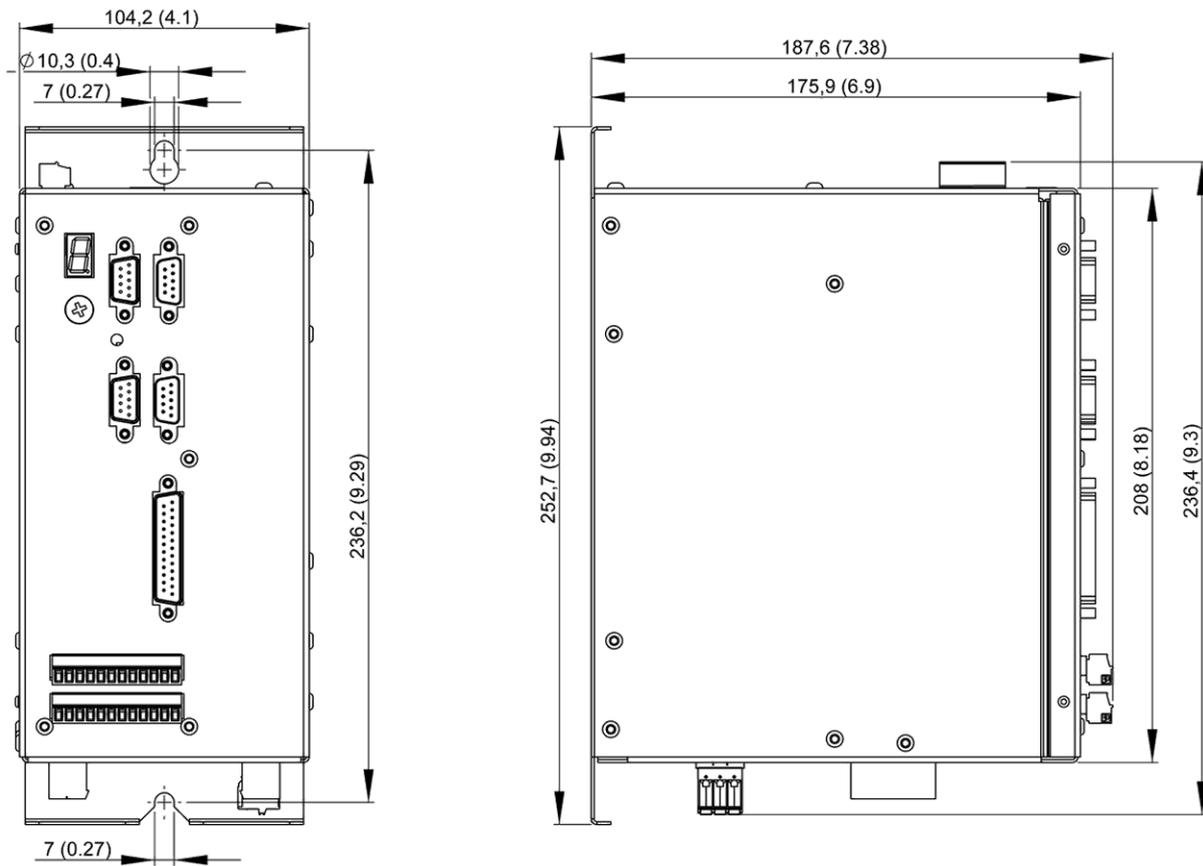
Dimensions of 0362x42EC in mm (inch)
